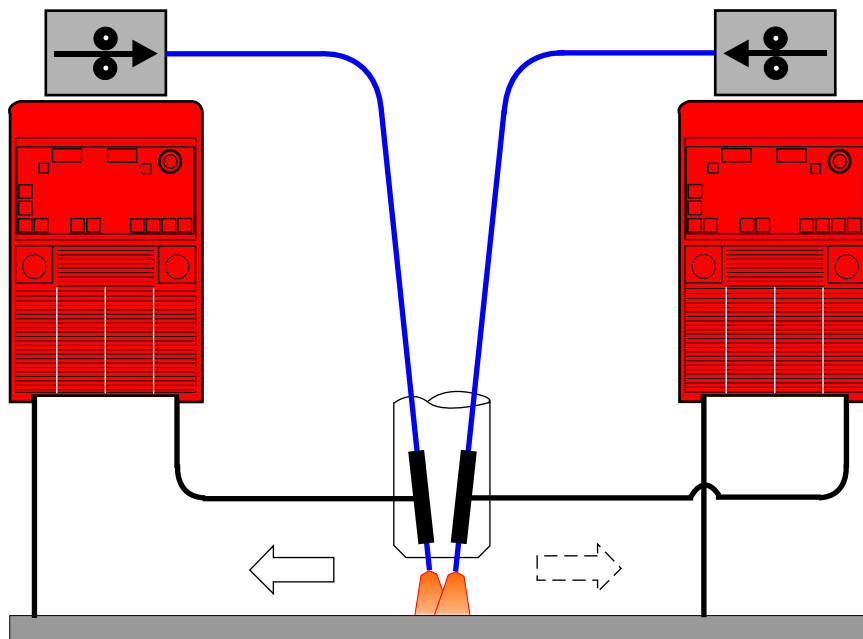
Tandem welding with two contact tubes electrically insulated from each other.
